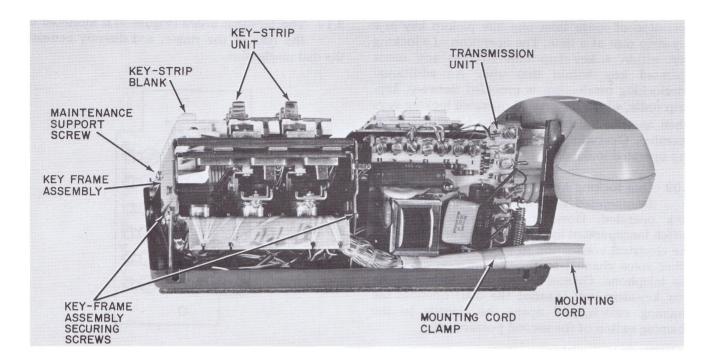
Type 860B Key Telephone Set Rear View with Housing Removed.
